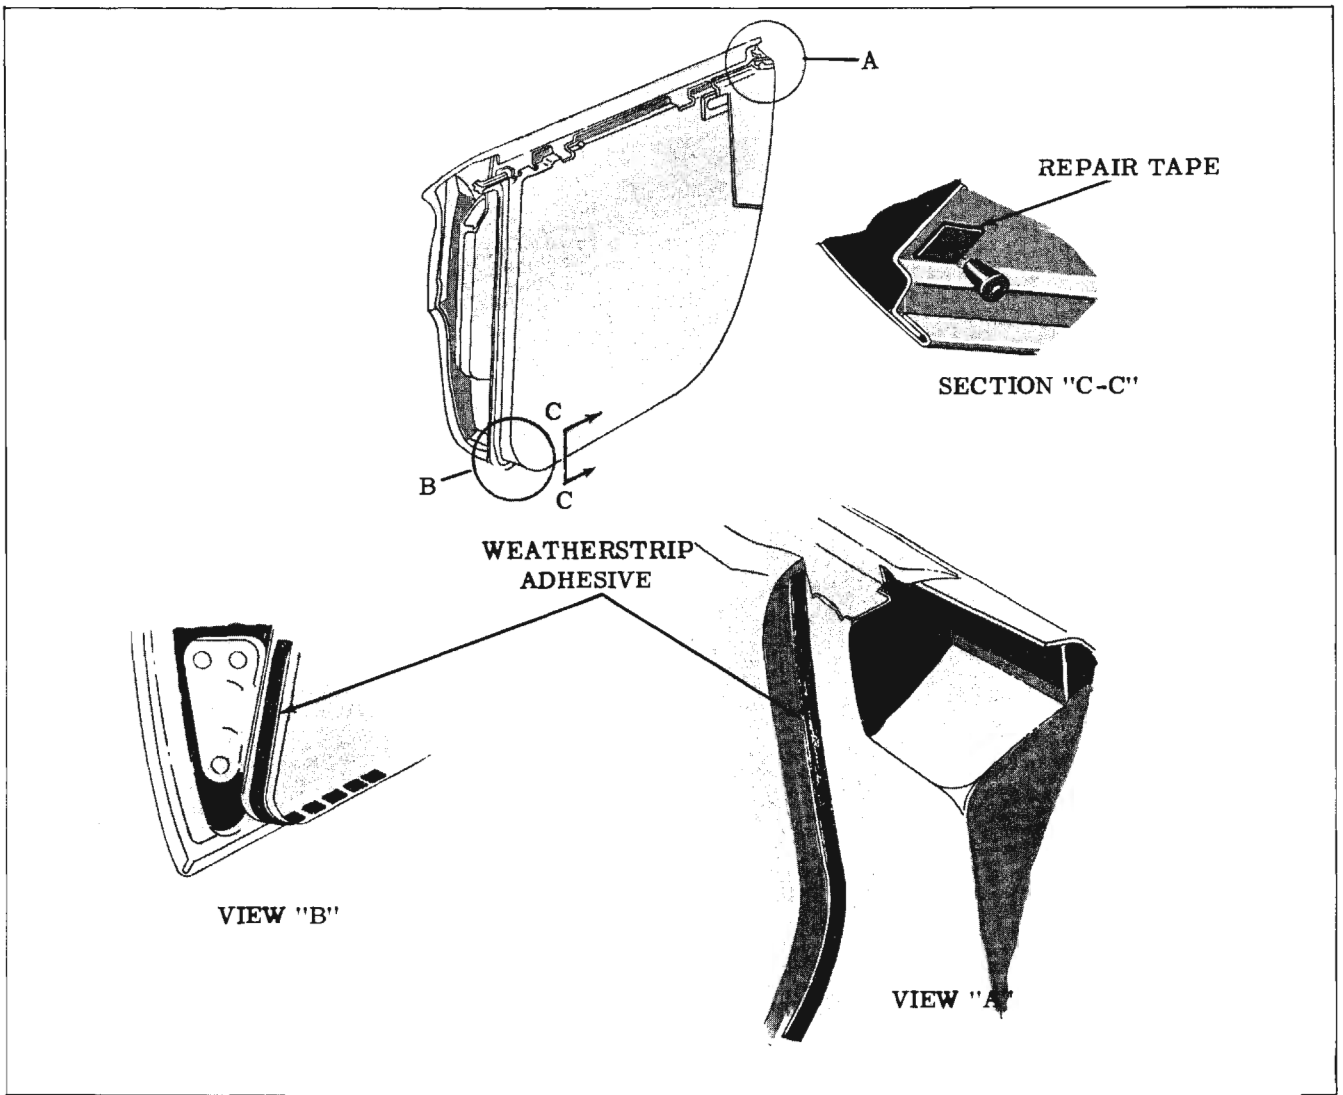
Weatherstrip Adhesive Application (29 Style Shown-39 Style Typical)
